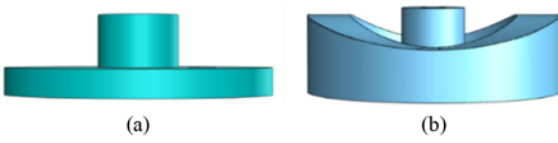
Crank wheel side view (a) Conventional crank wheel (b) Curved shape crank wheel
